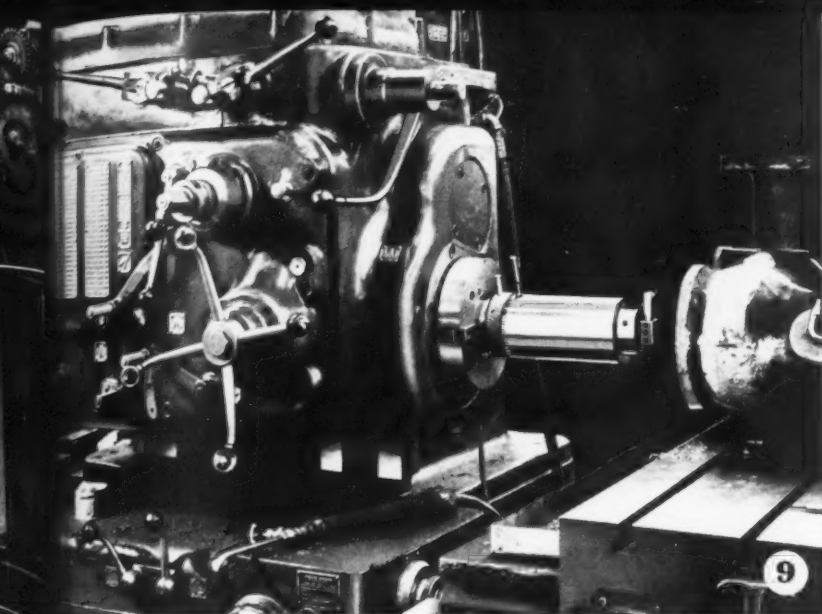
Boring Mill with Precision Universal Tool-head which Enables the Tool to be Fed Radially
